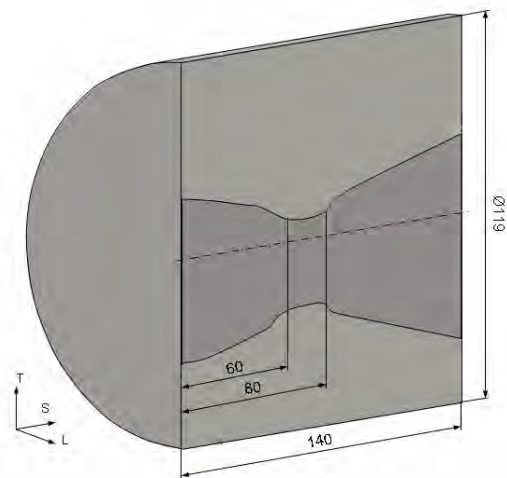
Trepan 1-1 with the location of the welding seam Fig. 4 Cutting scheme of disc 1-1.2 as an example
